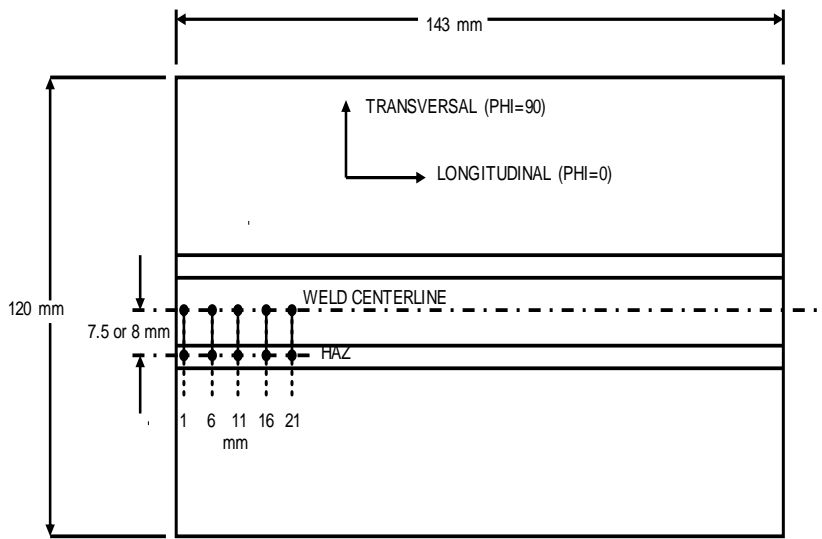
Measurement points along weld seam and HAZ for both directions: longitudinal and transverse.
